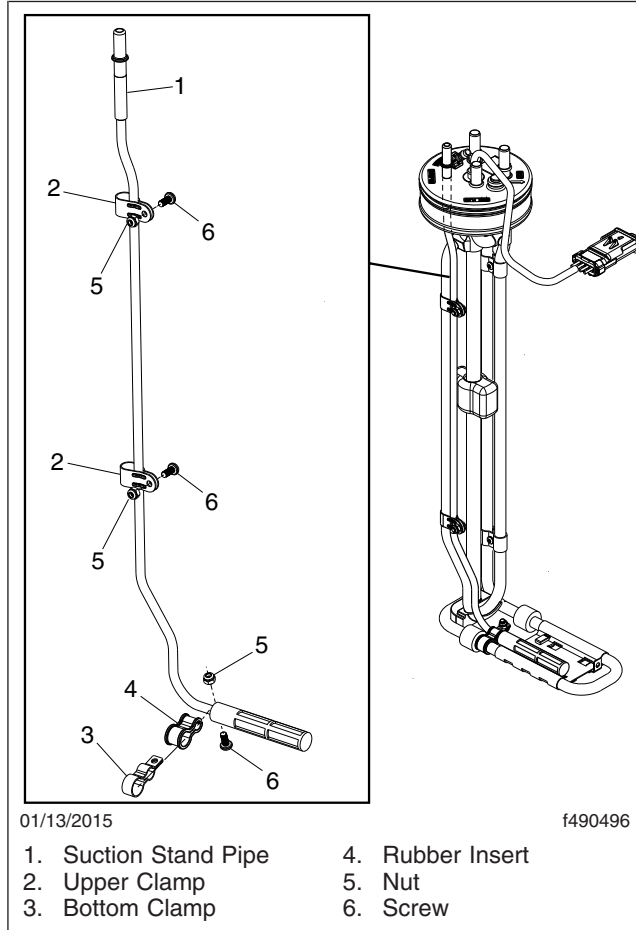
, WEMA Six Gallon DEF Tank Header Assembly
